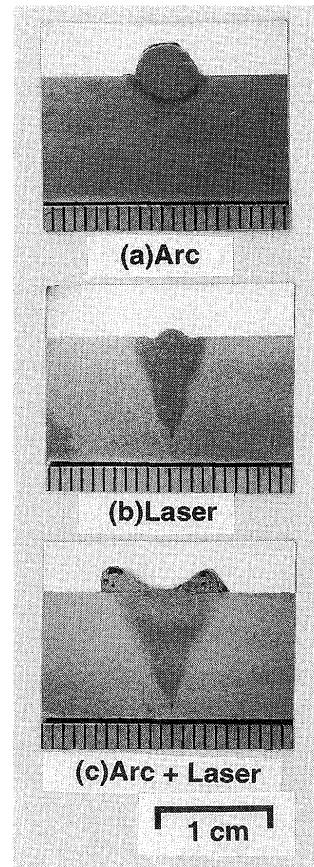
Typical bead shapes for (a) arc welding, (b) laser welding and (c) arc welding with laser beam.
